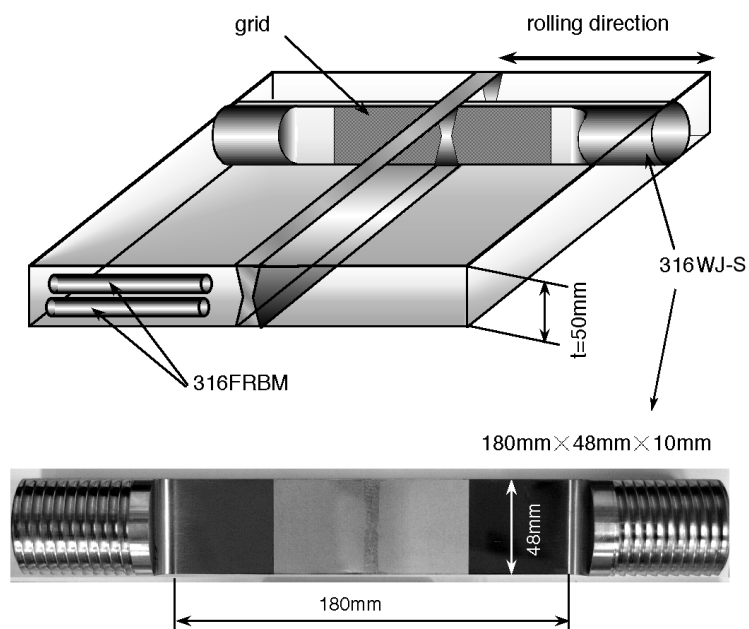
Sampling of test specimens from welded joint and external of welded joint.
